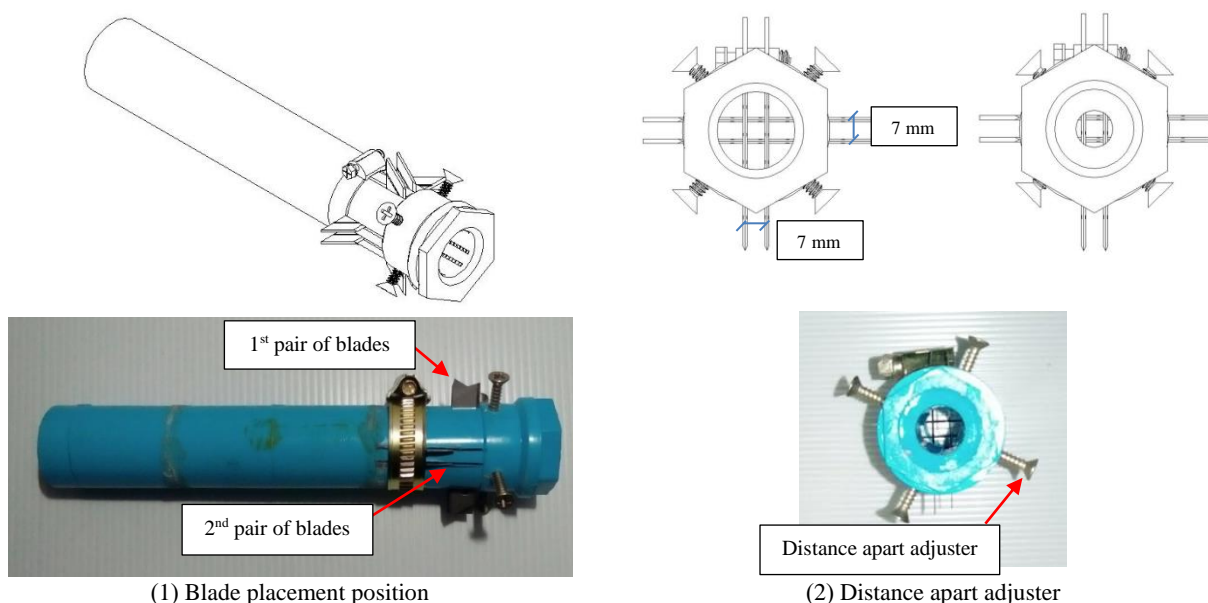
Blade placement position (1) and distance apart adjuster (2) of the blade assembly pipe
